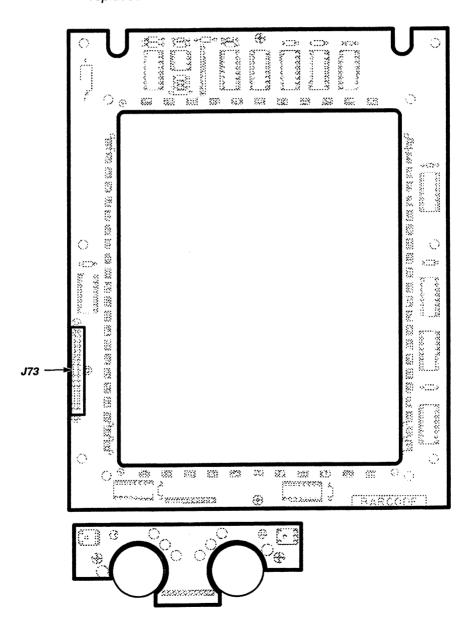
Removing/Replacing the A9 Touch Panel Assembly
